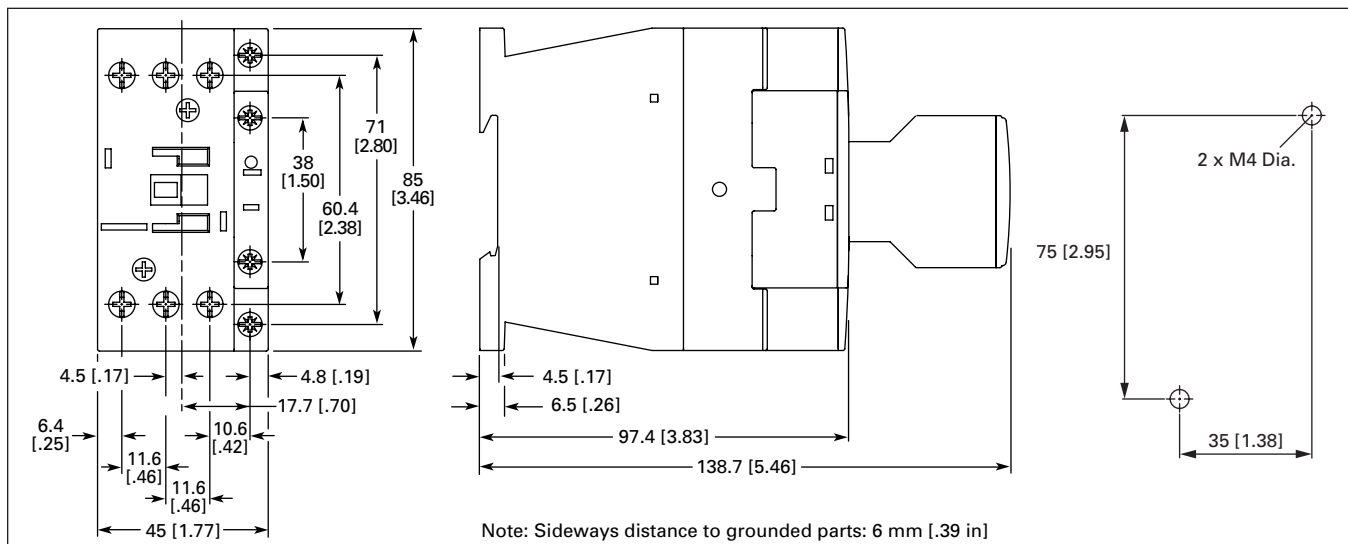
Frame C, XTCE018C – XTCE032C Contactors (18 – 32A) — Approximate Dimensions in mm [in]
